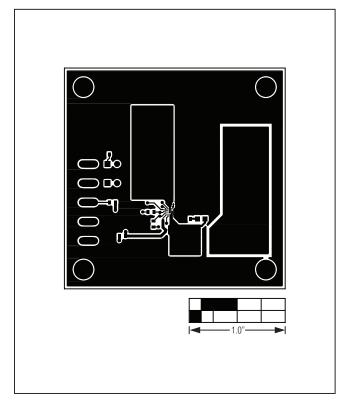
MAX15108 EV Kit PCB Layout—Component Side
